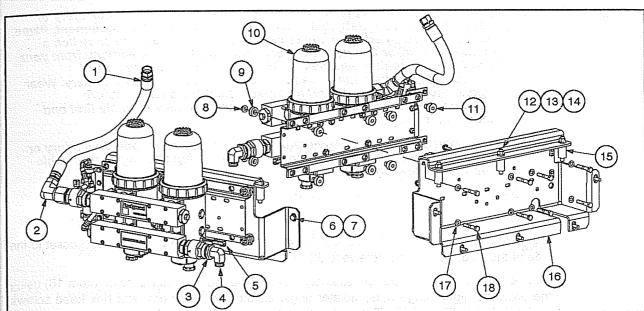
PRE-INSTALLED FUEL FILTER MOUNTING KIT
